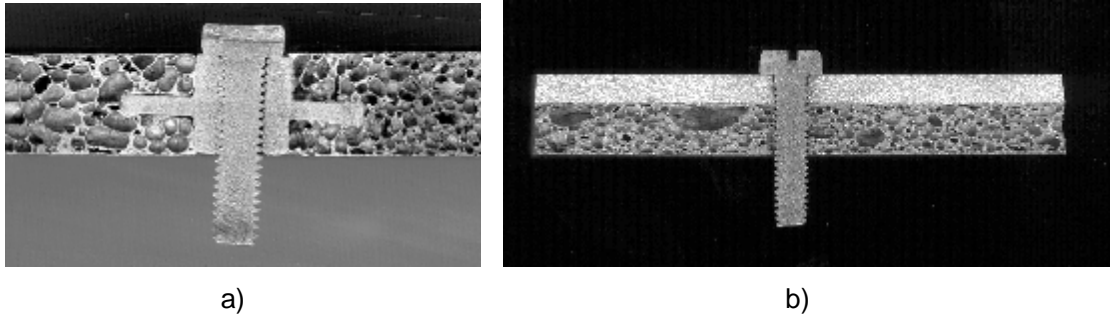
Joints made using bulk aluminium parts diffusion bonded to the AISi12 foam as: a) locally placed element, b) 3 mm thick Al - coversheet
